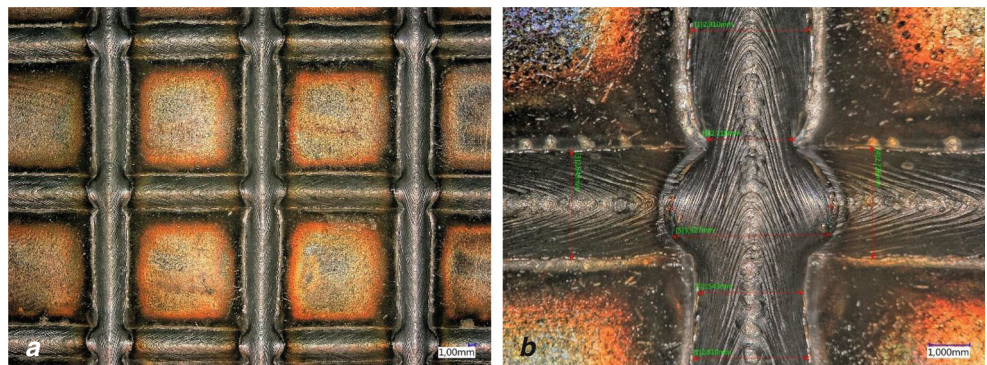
Welding results of additive manufacturing of a grid on uncoated steel sheets: close-up of a weld grid (a), close-up of an intersection point (b)
